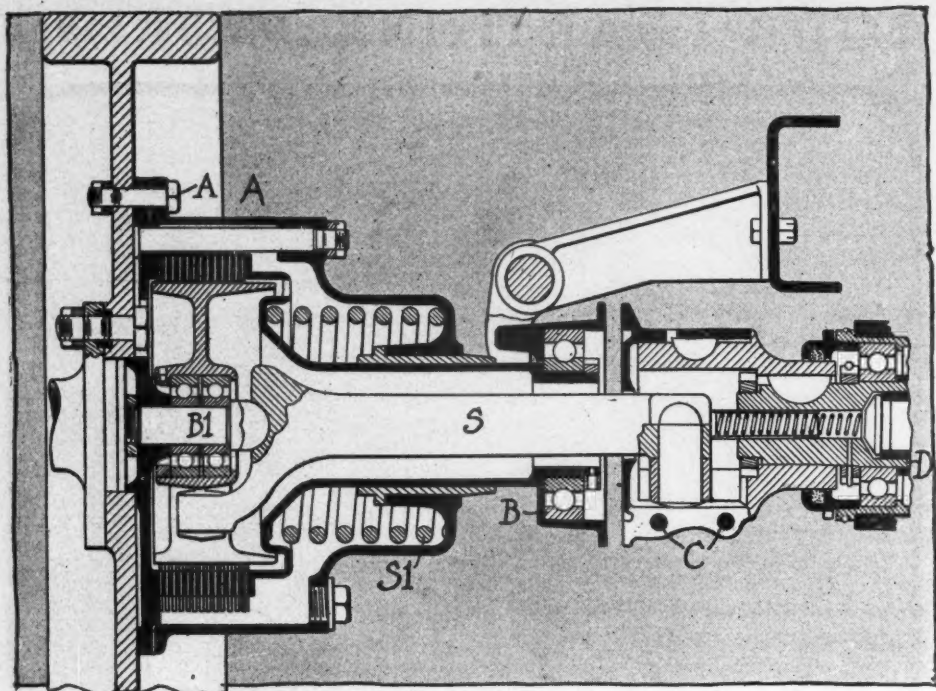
MULTIPLE-DISK CLUTCH ON LOCOMOBILE SIX
